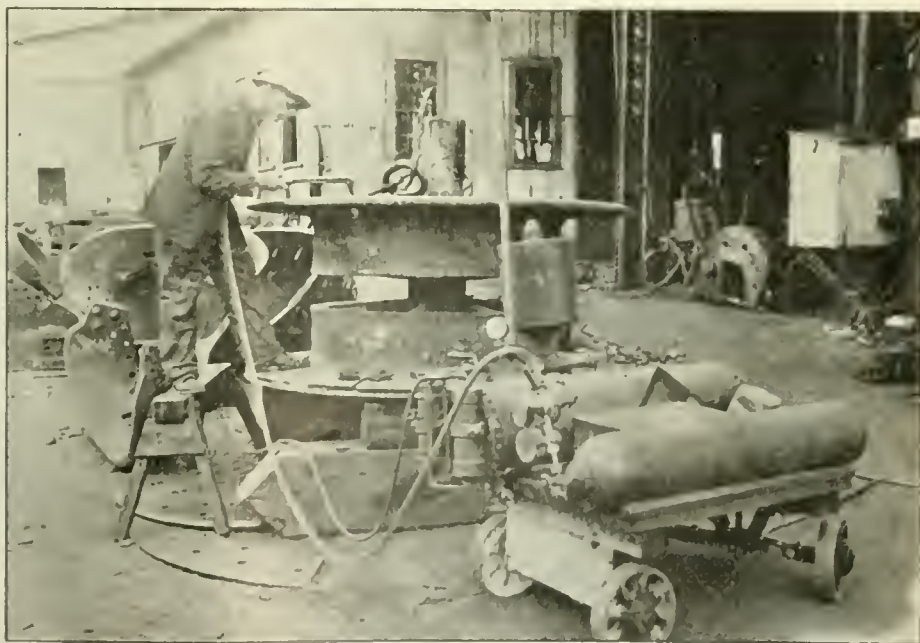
CUTTING RIVET-HOLES IN A MANGANESE-STEEL TUMBLER WITH AN OXY-ACETYLENE TORCH
